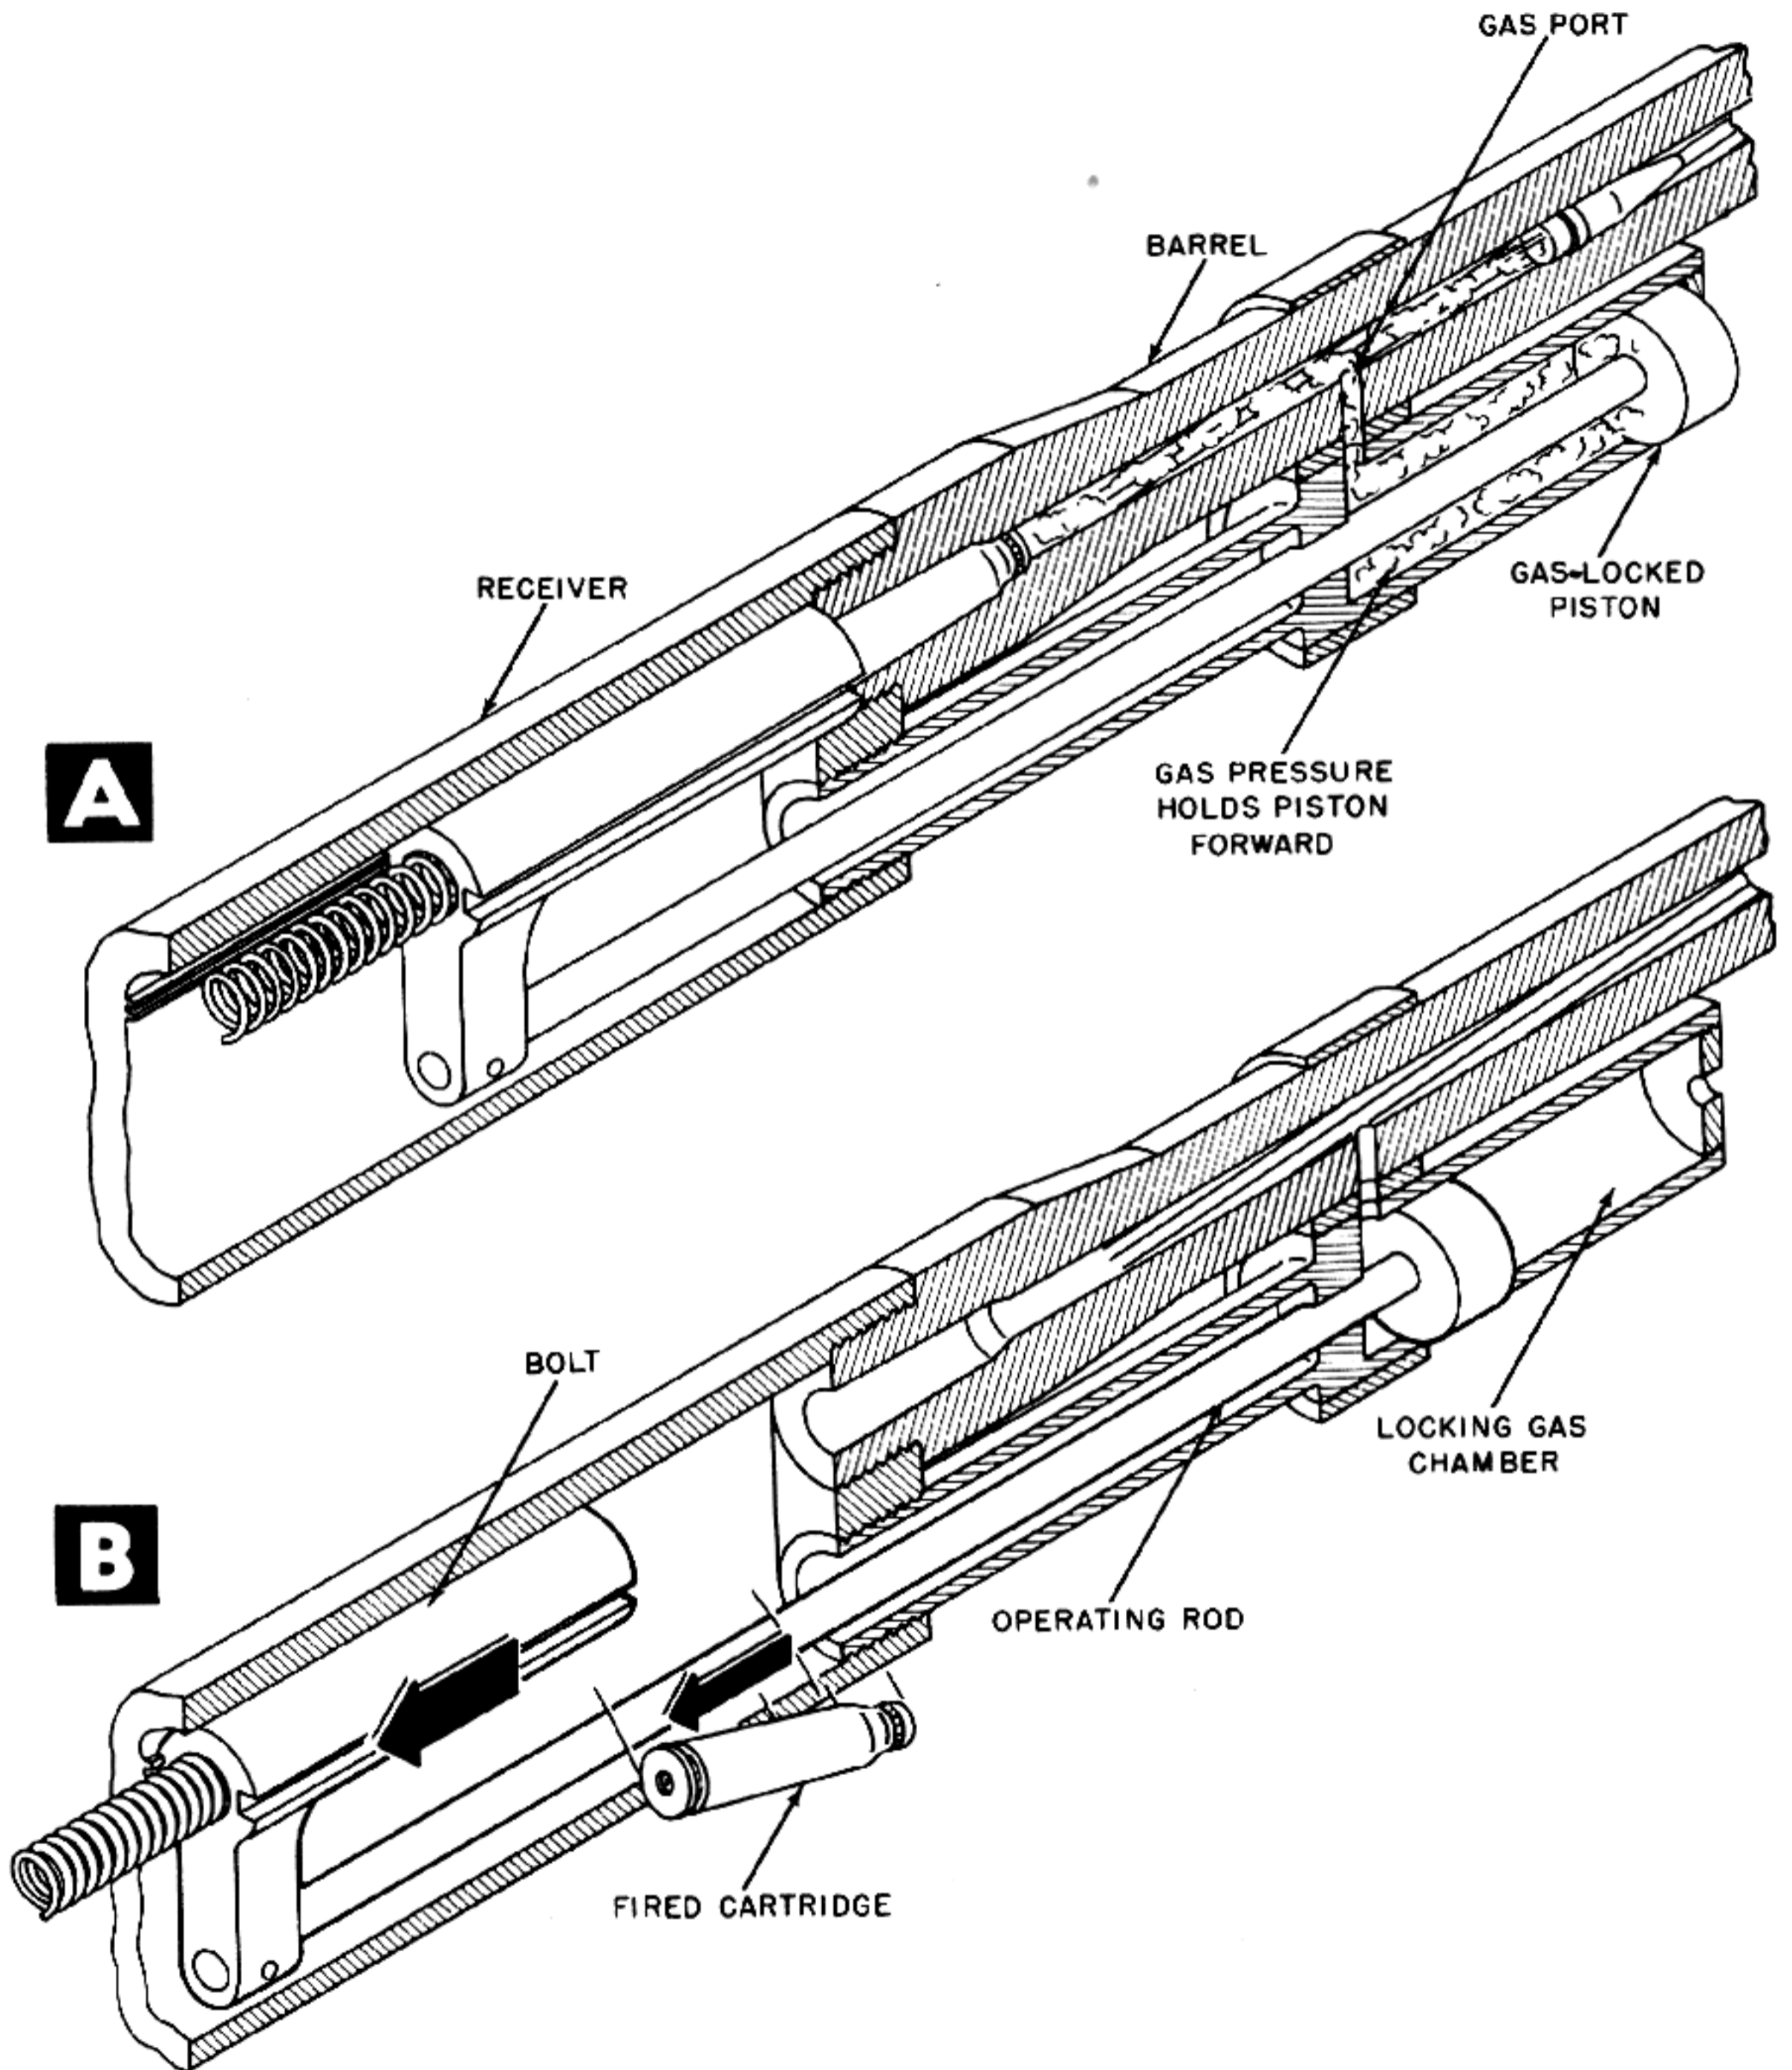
Bolt Is Locked to Barrel by Gas Pressure.
